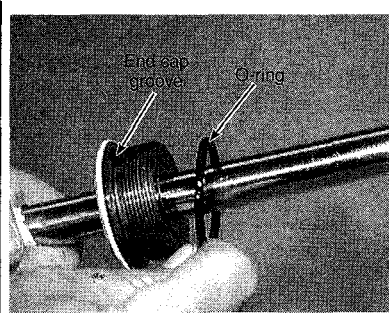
Lubricate and install a new O-ring onto the outside groove of the trim rod end cap
